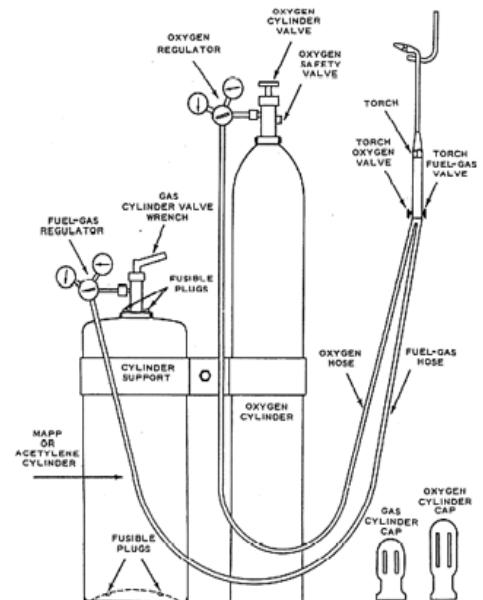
An Oxy-Acetylene welding outfit.
